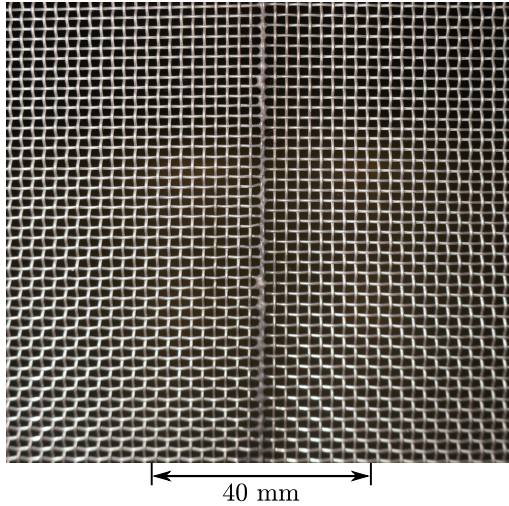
Close-up view of the weld between two screen halves.
